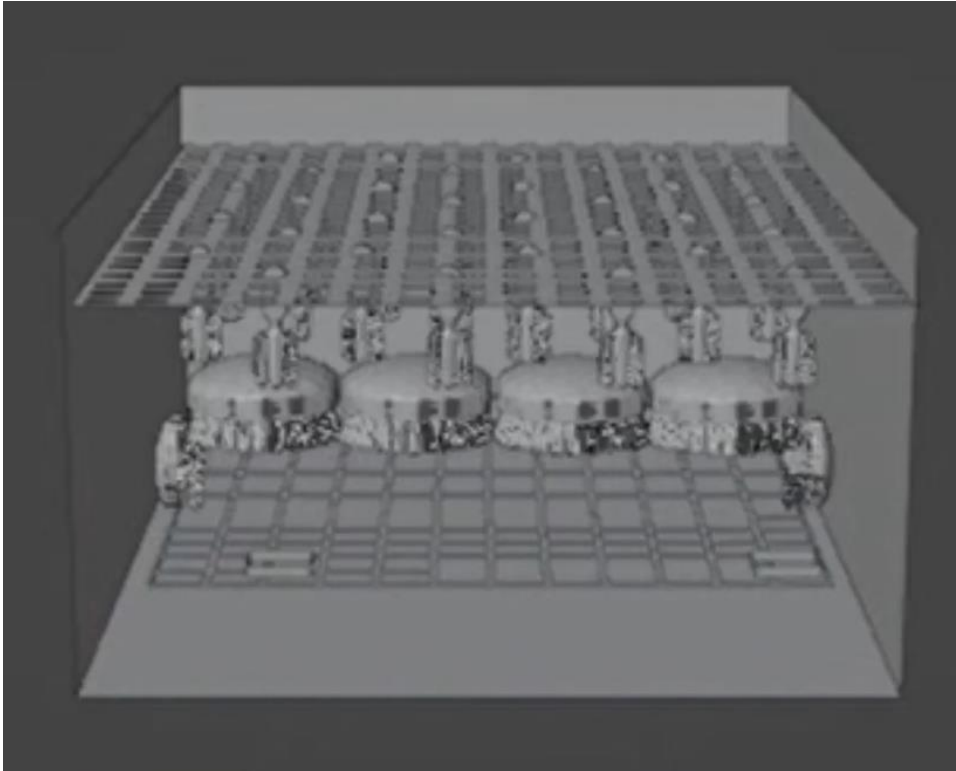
CAD drawing of final prototype facing grid and cleaning brushes.
